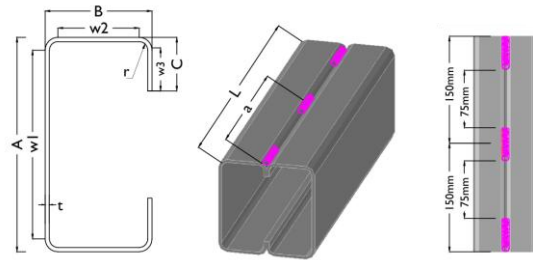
Box section cross-section shape and dimensions for a welded assembly in 2G position.
